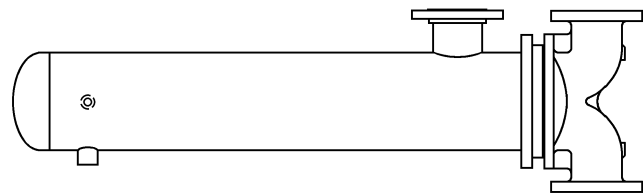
U-Tube Shell-and-Tube Heat Exchanger with Removable Bundle Assembly and Cast K-Pattern Flanged Head
